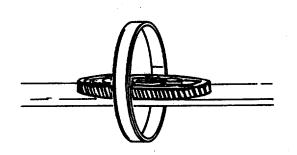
Camshaft Gear Coil Shot Check.
